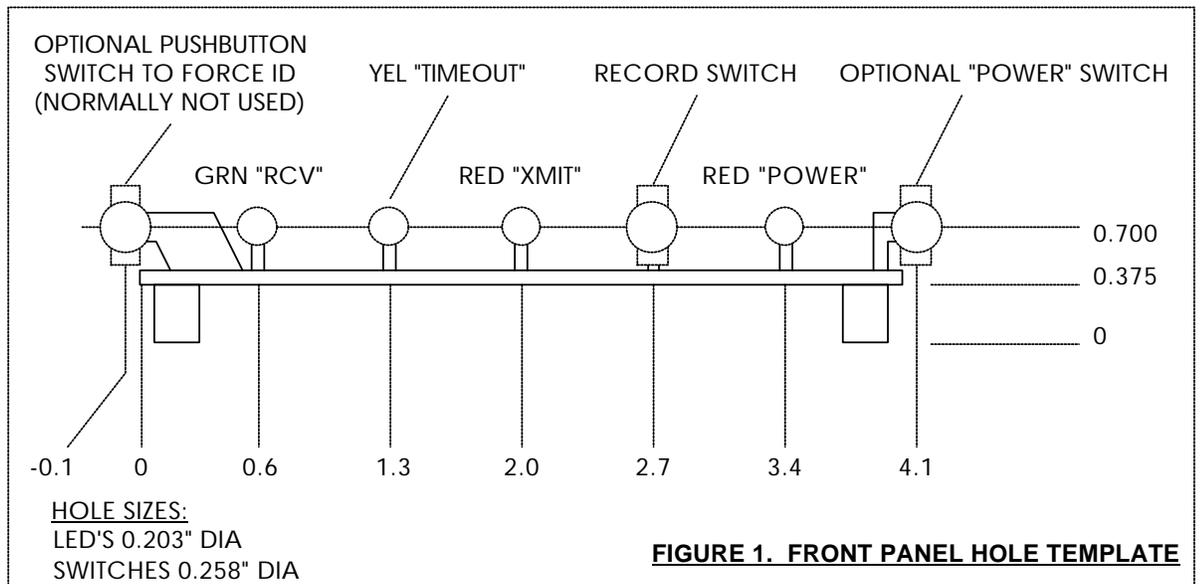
FRONT PANEL HOLE TEMPLATE
